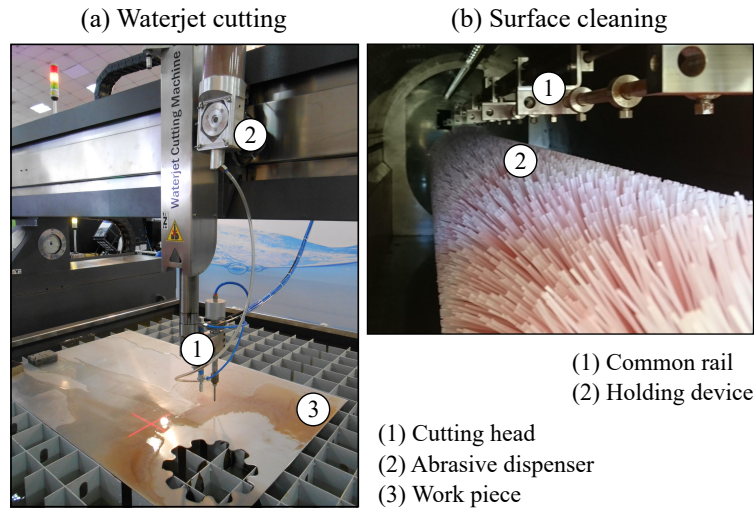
Example of waterjet applications: (a) work station equipped with a single cutting head after cutting a desired 2D-couture in a steel sheet. (b) stripping machine with 16 nozzles on a common rail and holding device for matrices used to strip off paint from its surface.³
